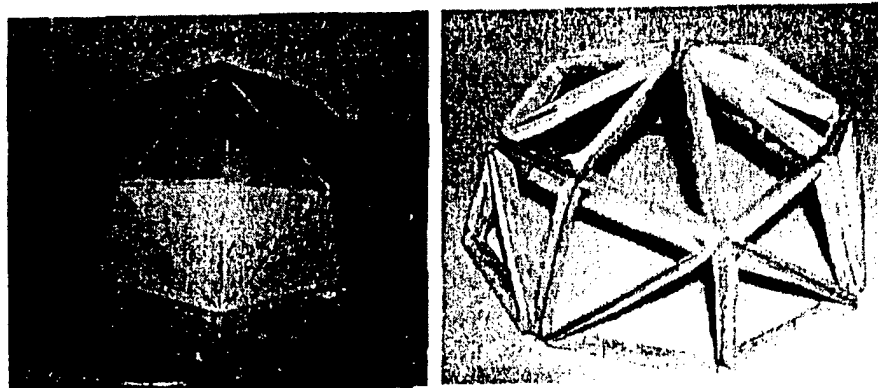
Tool and grid of faceted faces of a hemispherical shell.
